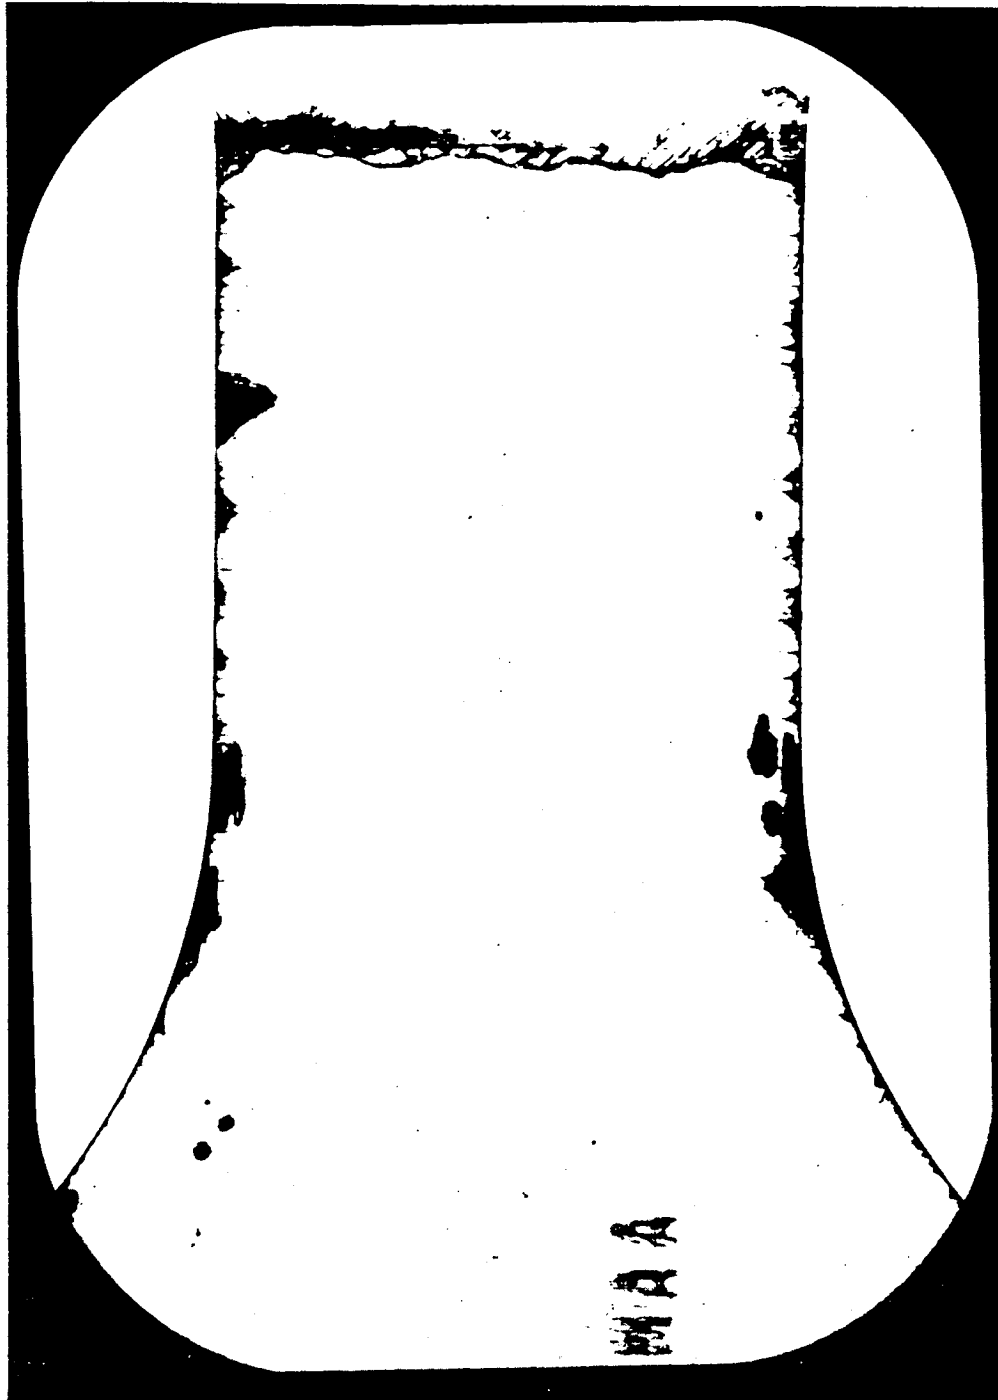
X-RAY OF DEBOND SPECIMEN SHOWING FATIGUE DAMAGE
